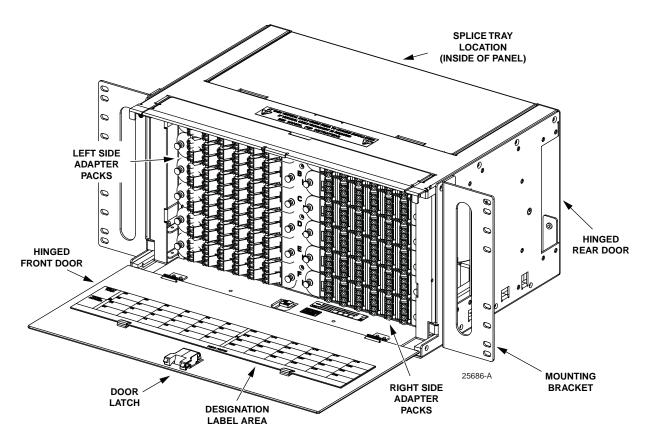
Typical FPX Fiber Panel Configured With Adapter Packs (5RU Front View Shown)
